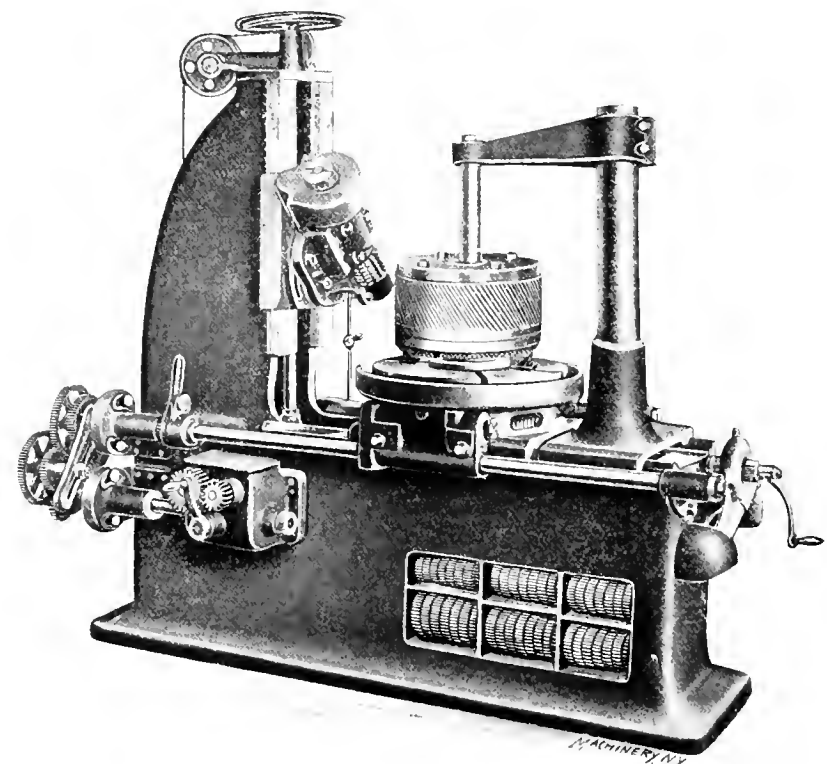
Gear-hobbing Machine, made by Gould & Eberhardt, Newark, N. J.
